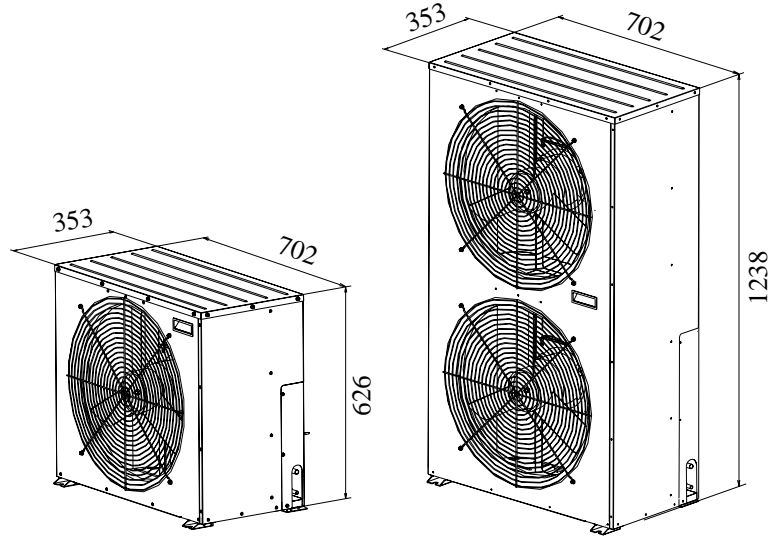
Dimensions of standard outdoor units (unit: mm)
